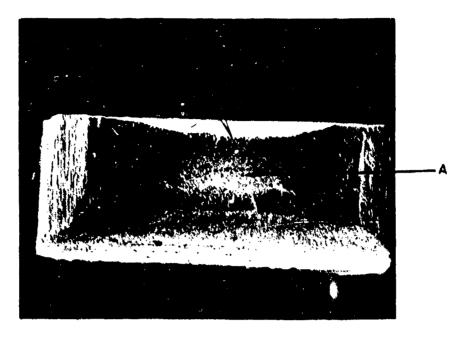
Tensile fracture surface of an A-514 weld specimen, 25x.
